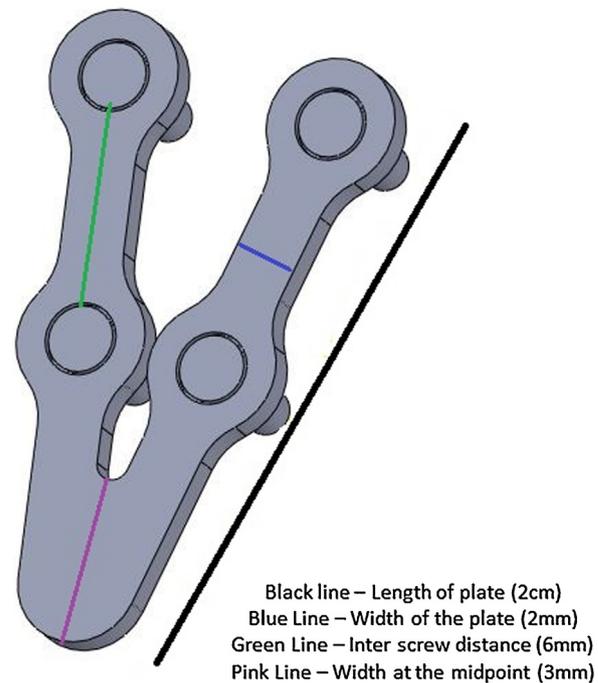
Diagram of the dimensions of the V-shaped plate.
